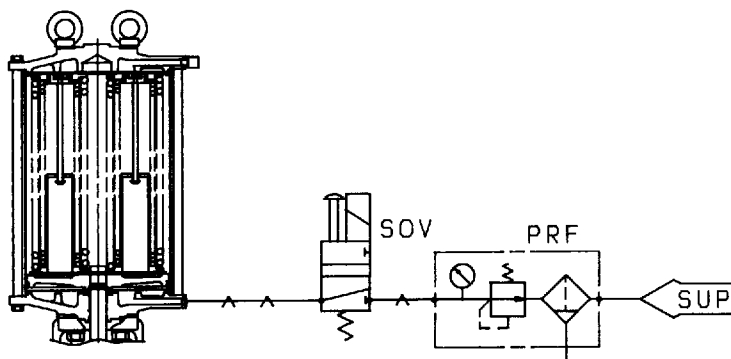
A DOUBLE ACTING TYPE : SOLENOID VALVE ENERGIZED DRIVE SHAFT DOWN
